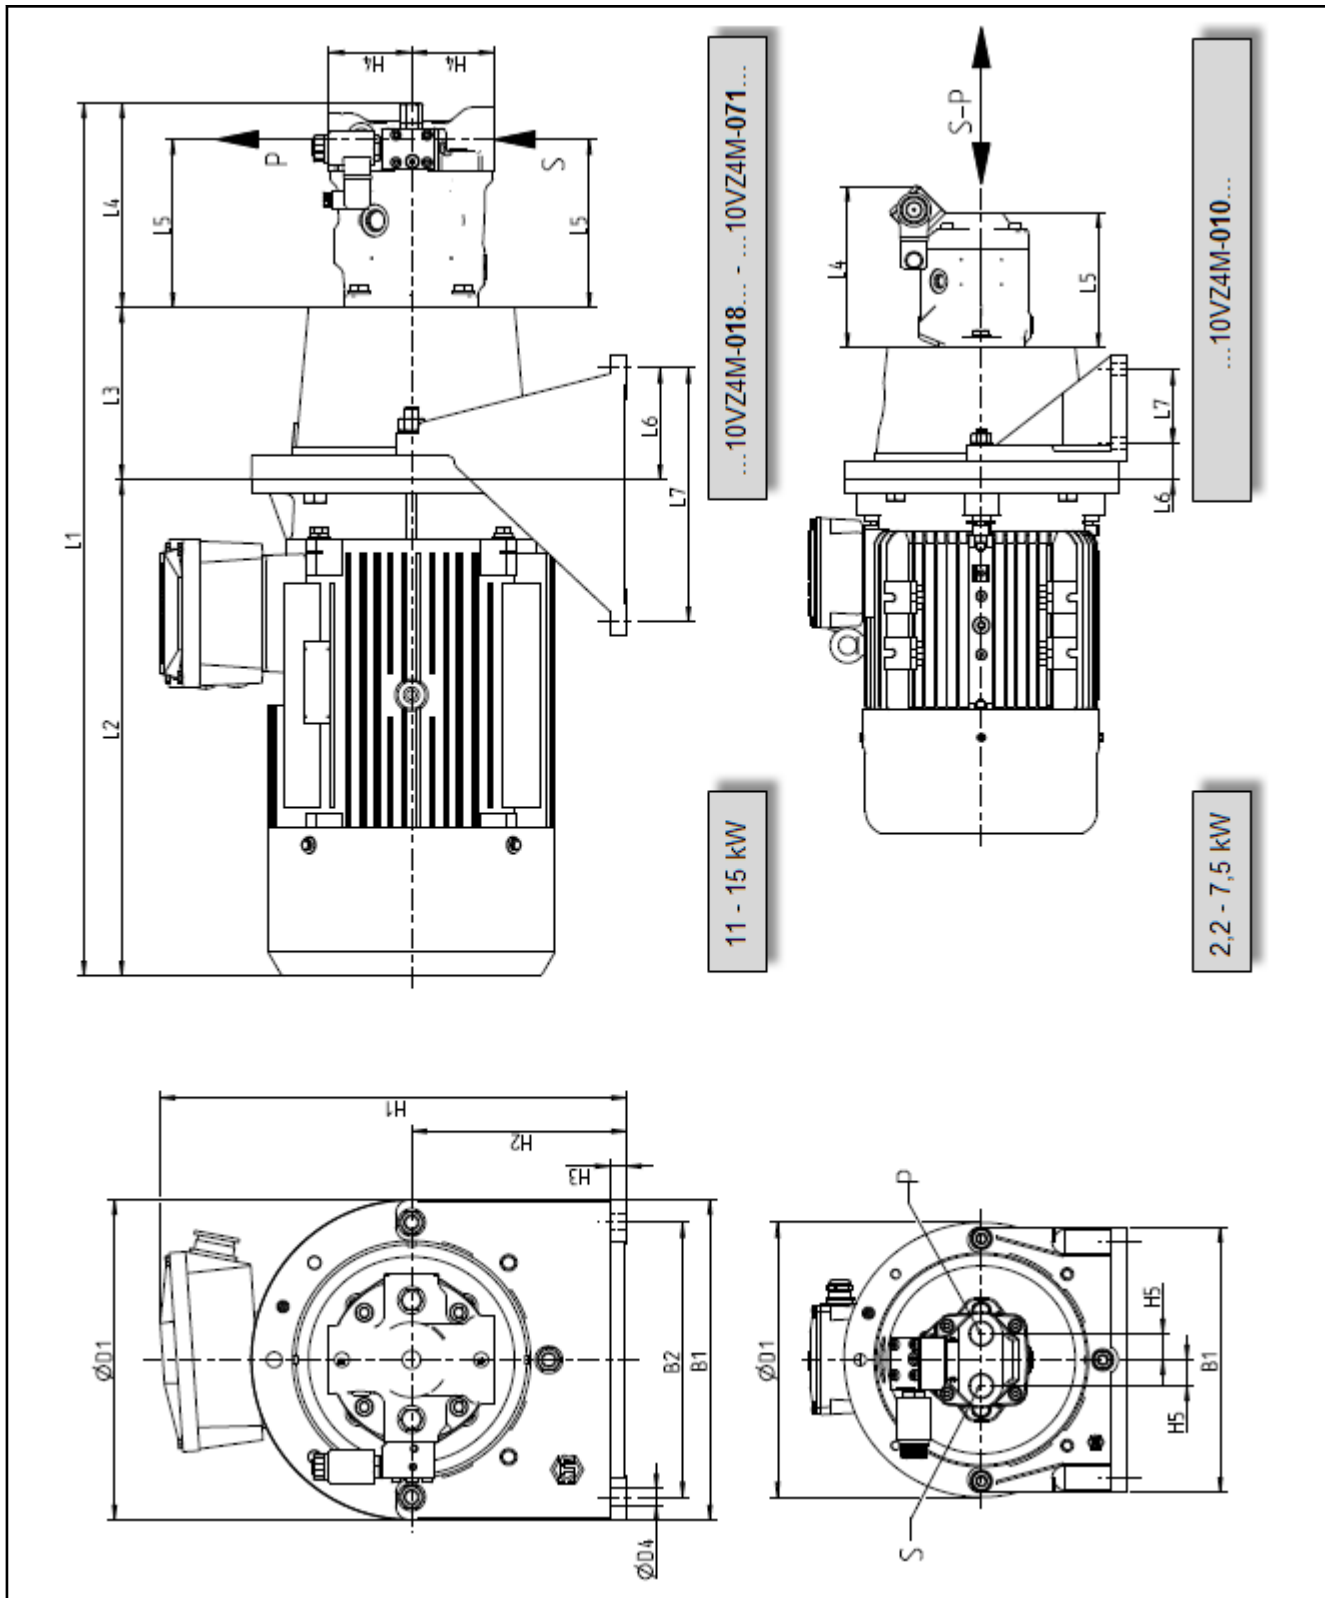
Dimension sheet "MPES2" with "A10VZO" in fastening mode "B" [horizontal foot fastening for motors from 2.2 up to 15 kW]
